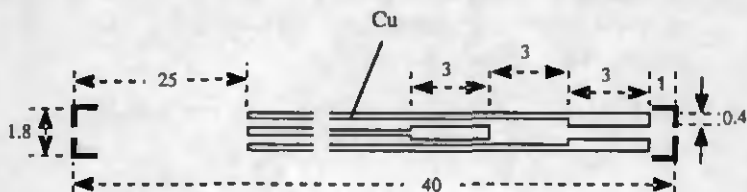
Schema of the PCB used for catheter type packaging.
